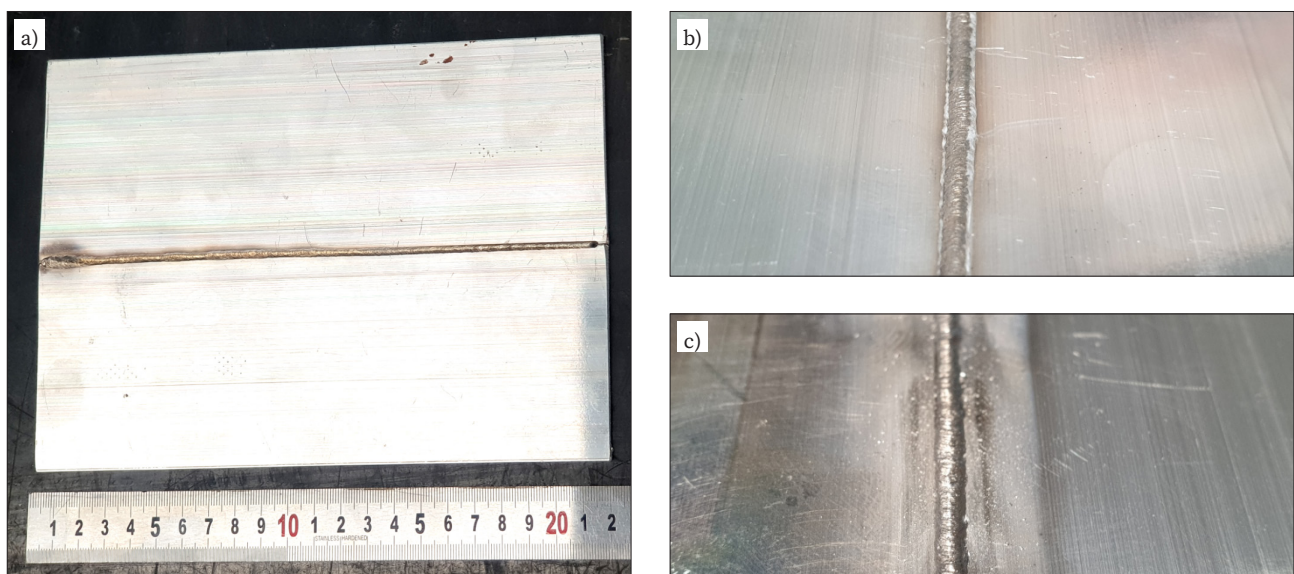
Joint made of alloy grade 6060: a) main view, b) weld face and c) weld root
